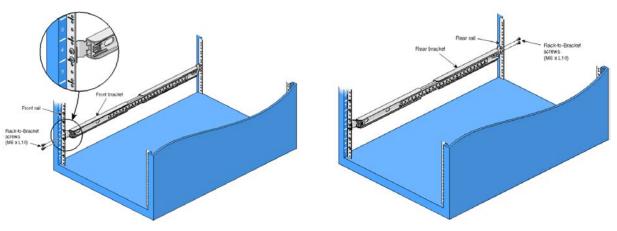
Rack Mount Slide Rails Attached to Rack Frame
